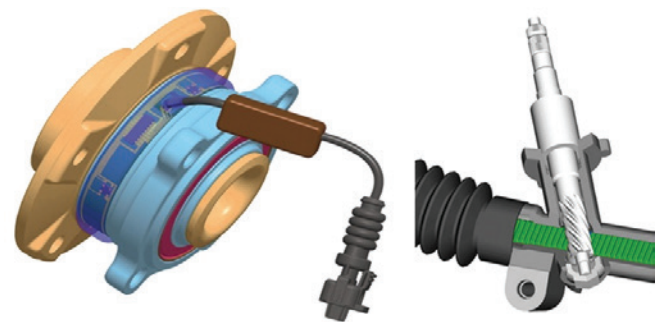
Sensor layer for measuring the wheel force at the wheel bearing (on left) and for measuring the steering moment in the steering gear
